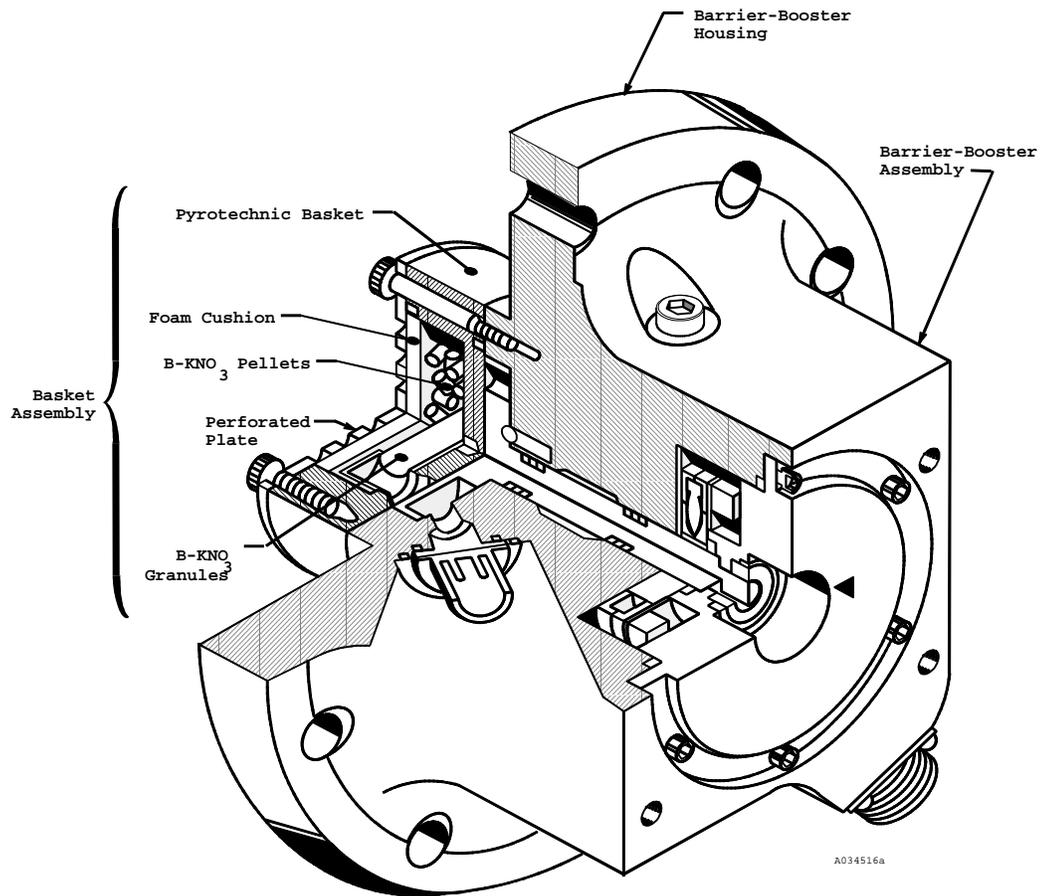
Pyrotechnic-Basket Assembly Mounted to Barrier-Booster Assembly Housing
